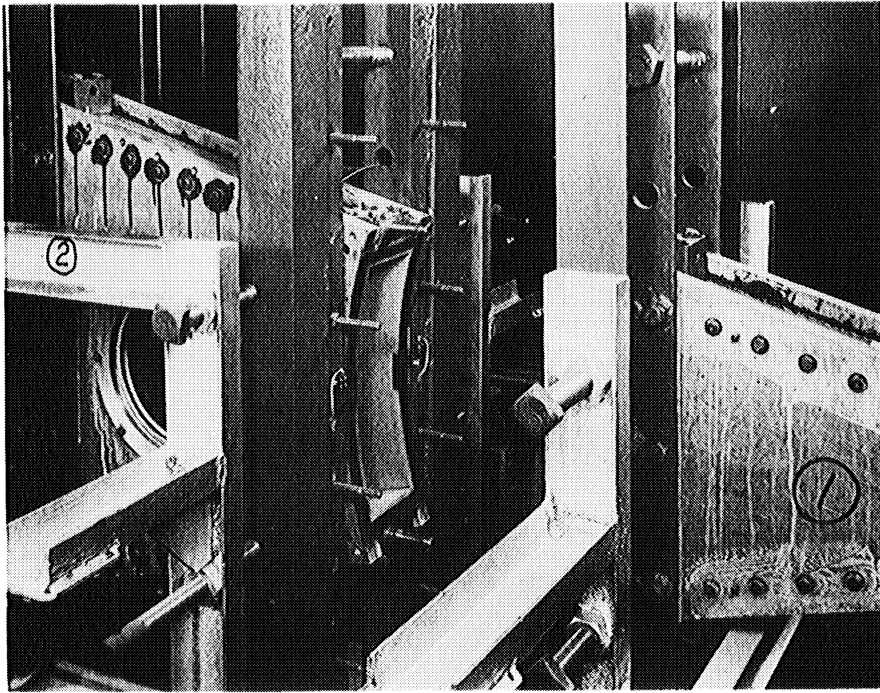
Details of the diaphragm breech showing the locating pins and clamping bolts.
